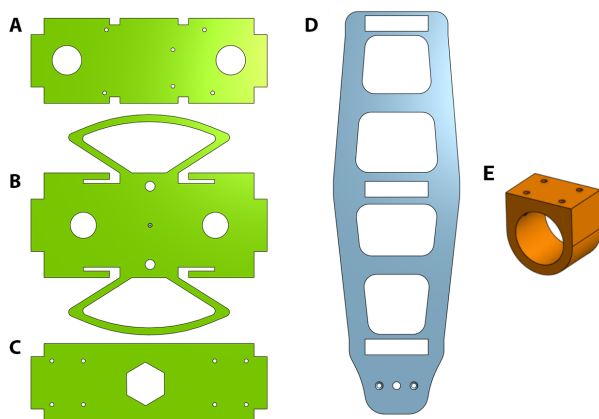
Chassis components of the self-balancing robot: (a) Top shelf designed for mounting the microcontroller board, (b) Middle shelf with bumpers for accommodating the batteries, (c) Bottom shelf designed for housing the motors, with motor mounting holes and wire pass-throughs, and (d) Side plate used for holding the three shelves in place.
